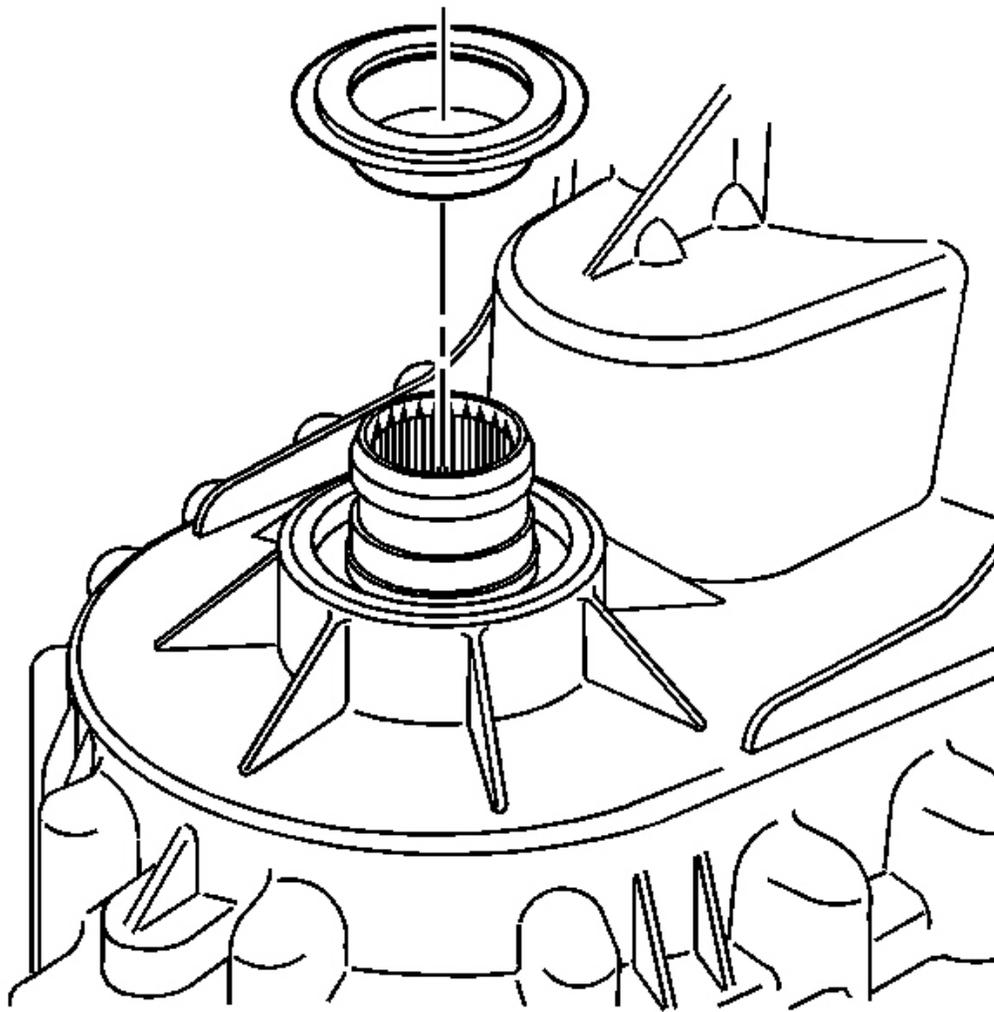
View Of Inner Seal Race From The Front Output Shaft
